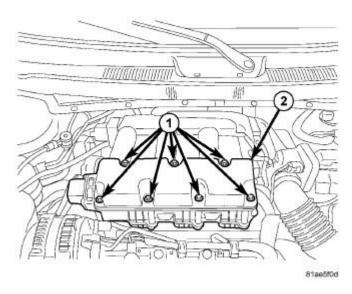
INTAKE RETAINER VIEW Courtesy of CHRYSLER LLC
